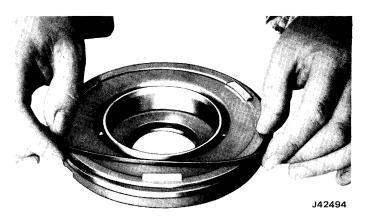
Removing Forward Clutch Piston Outer Seal
